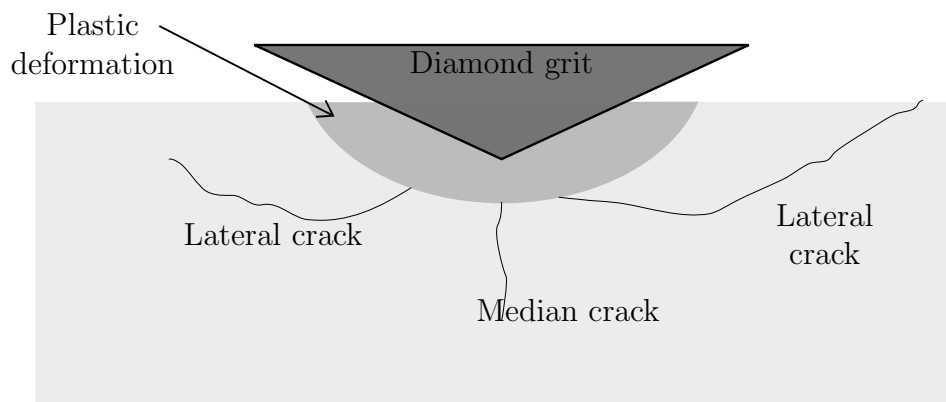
Illustration of the theoretical material removal mechanism in fixed-abrasive sawing. Material is removed when lateral cracks extend to the c-Si surface.
